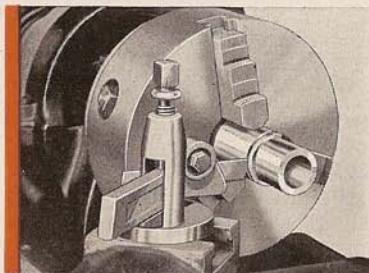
Making Bushing Complete Without Removing Work from Chuck.
